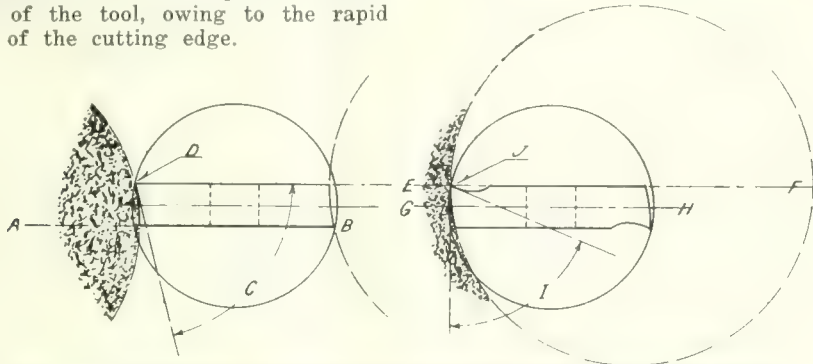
ILLUSTRATING PRINCIPLE OF GRINDING FLAT BORING CUTTERS.
